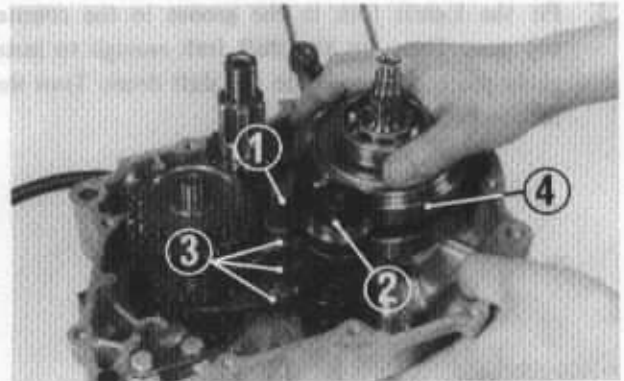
(1) Shift fork guide shaft (2) Shift drum (3) Shift forks (4) Crankshaft
